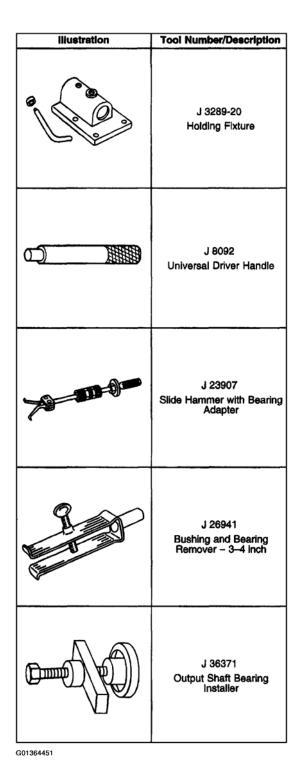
Identifying Special Tools & Equipment (1 Of 4)
